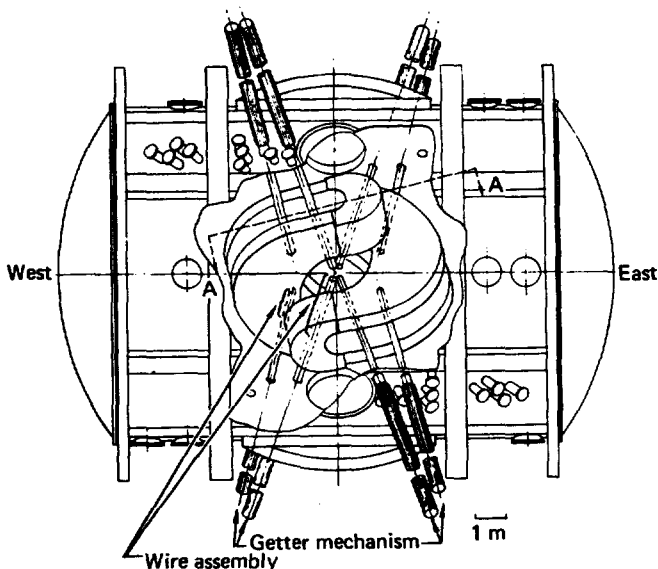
Plan view of MFTF. A-A is the cut plane for Fig. 3.
